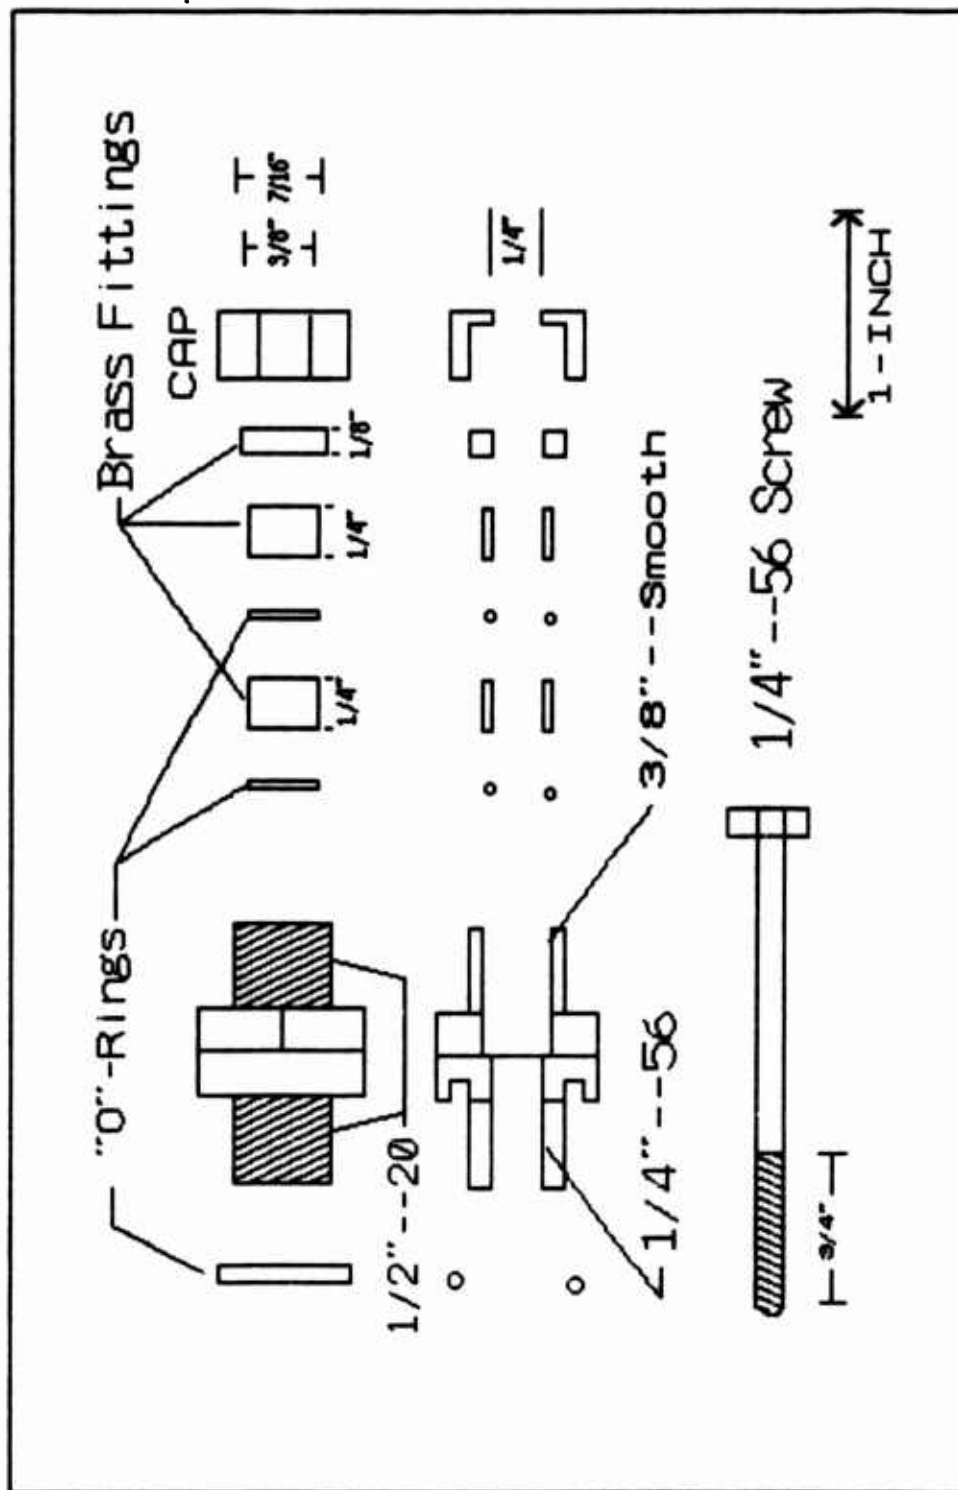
Vacuum Tight Adjustment Screws for Mirror
